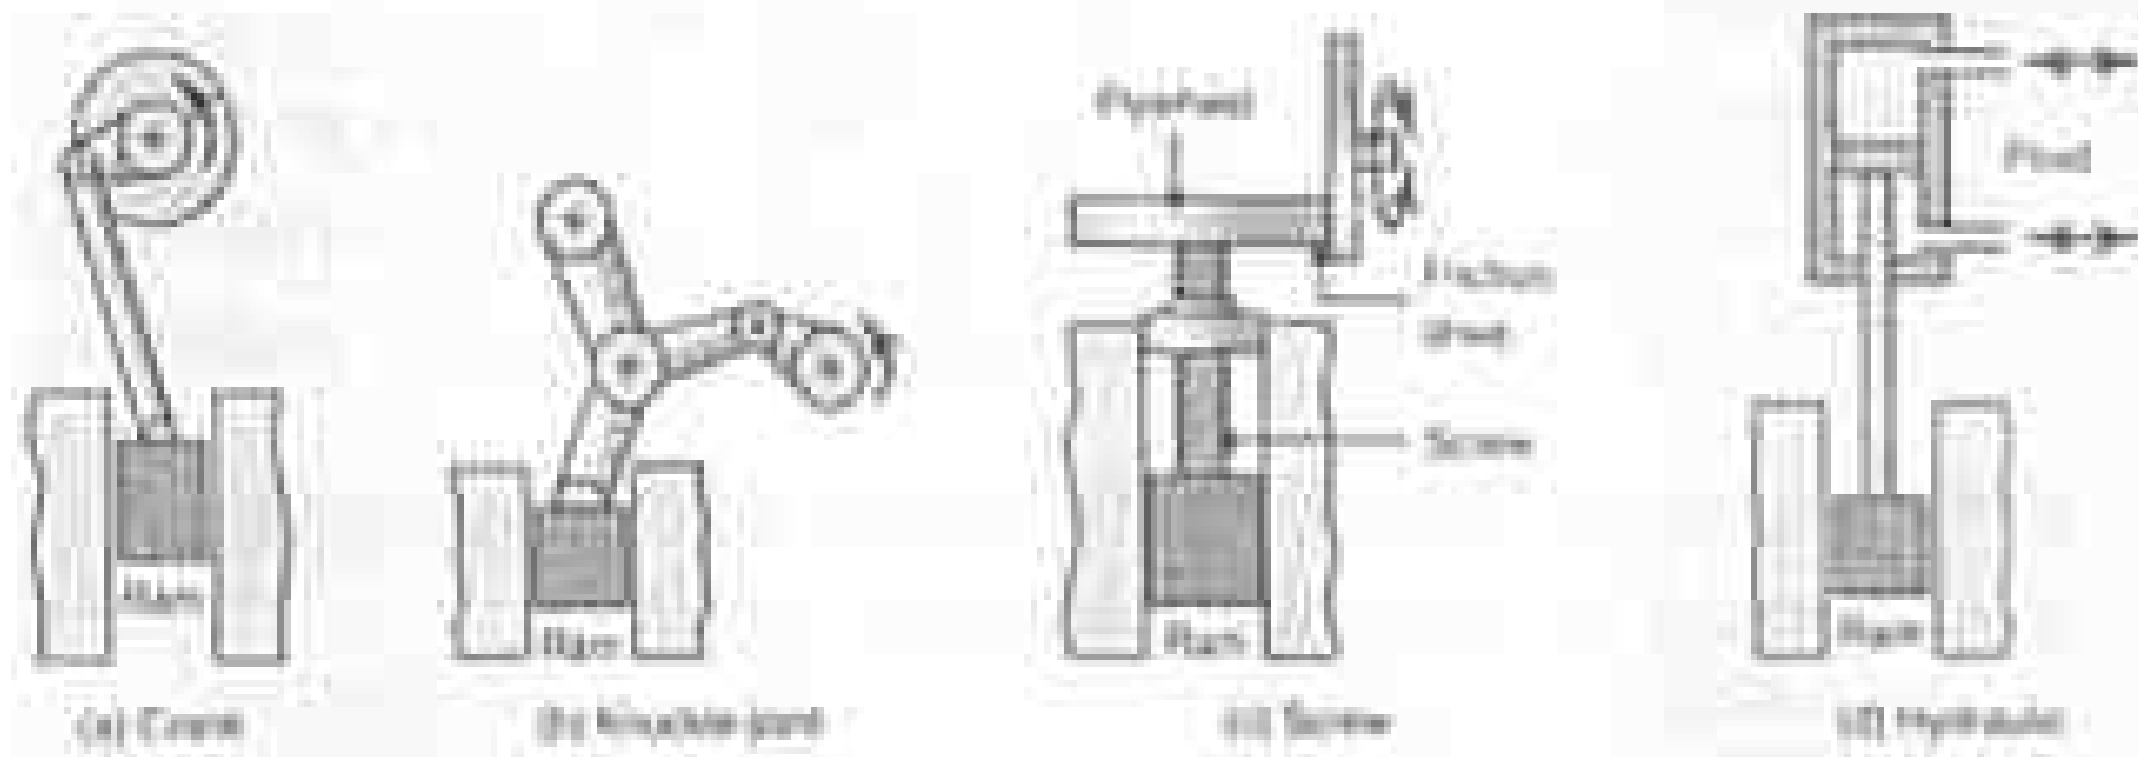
Schematic illustration of the principles of various forging machines. (a) Crank press with an eccentric drive; the eccentric shaft can be replaced by a crankshaft to give up-and-down motion to the ram. (b) Knuckle-joint press. (c) Screw press. (d) Hydraulic press.
